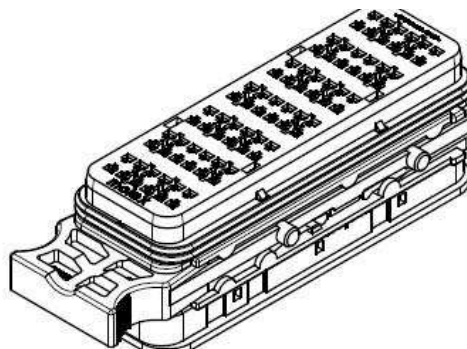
SRC Female 84 Pin Receptacle Housing Assembly
